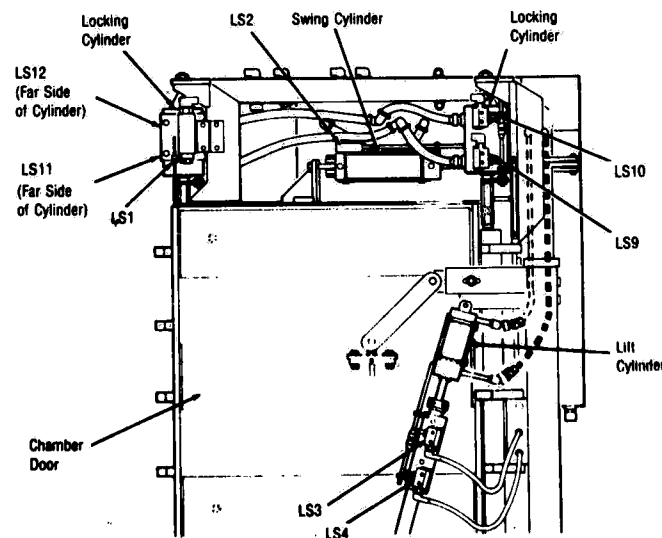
DOOR LIMIT SWITCH LOCATIONS (VIEW WITH PANELS REMOVED).
